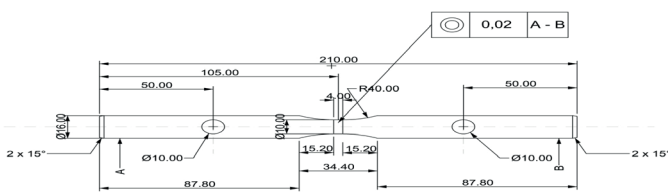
Dimensions of the specimen prepared for testing on STD torsion plastometer
